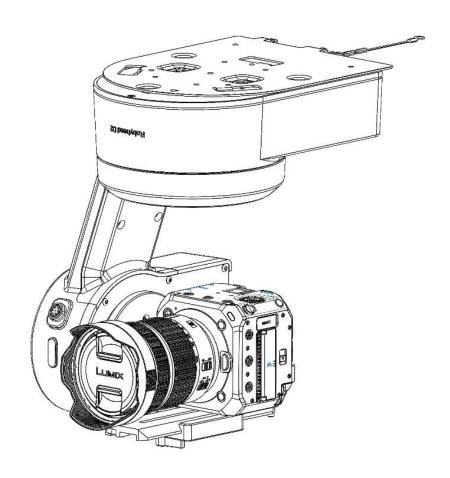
"Reversed" mount assembly for suspended camera mounting
